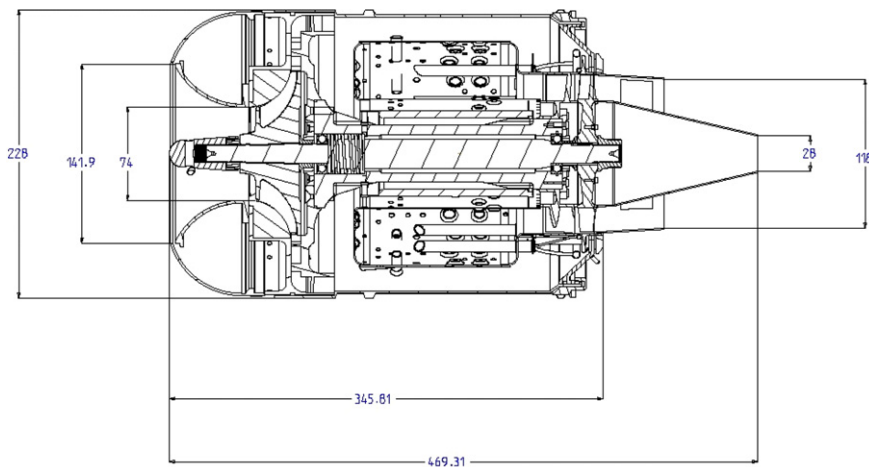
Two-dimensional drawing of the designed turbojet (dimensions in mm).
